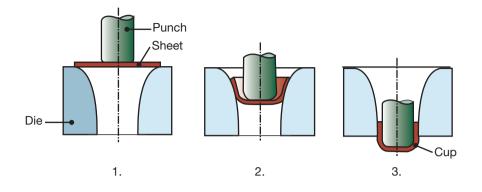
Stages in deep drawing without a blankholder, using a *tractrix* die profile.
